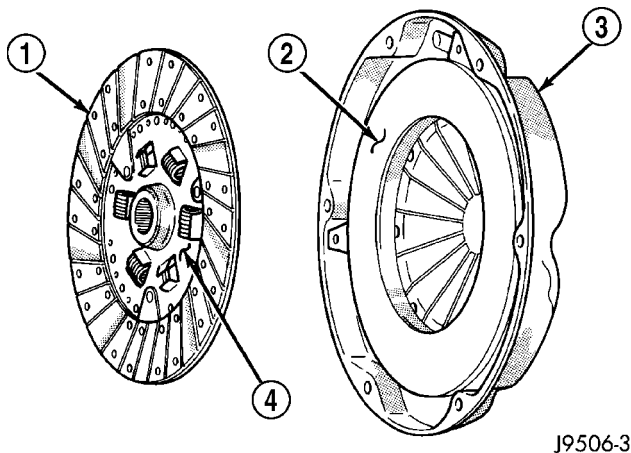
CLUTCH DISC AND PRESSURE PLATE
